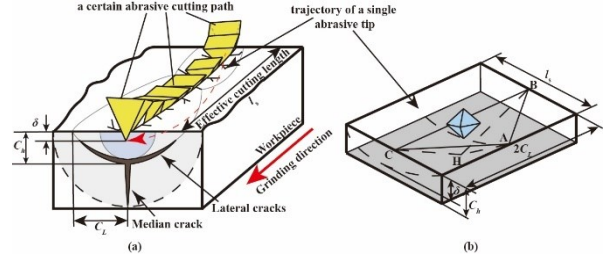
Schematic illustration of material removal process in brittle fracture mode in UVG. (a) Microscopic view of grinding process, (b) The volume of brittle fracture material removal by single grit.
